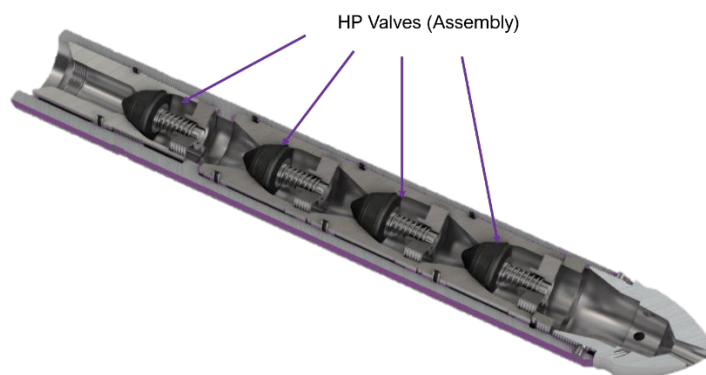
Advanced valve latch shoe tool wet shoe with four redundant high-pressure valves and an aluminum guide nose designed for efficient casing deployment
